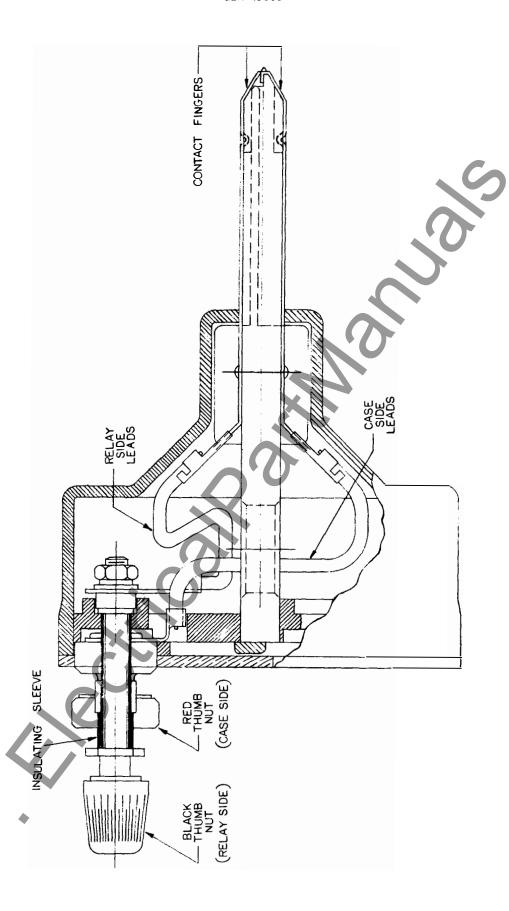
(0108B9128-0) Sectional View of 12XCA28A1 Test Plug
